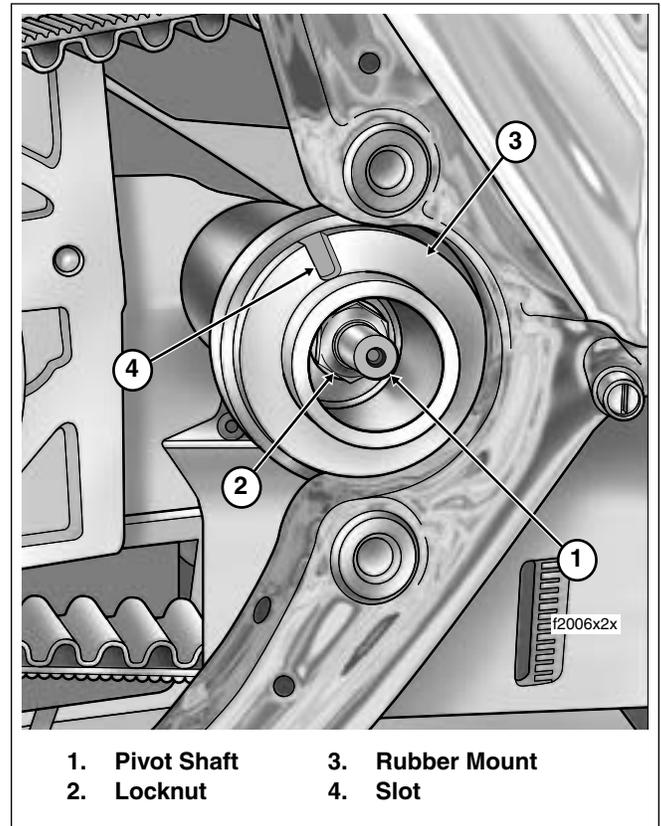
Remove Rear Swingarm Bracket (Left Side View)
